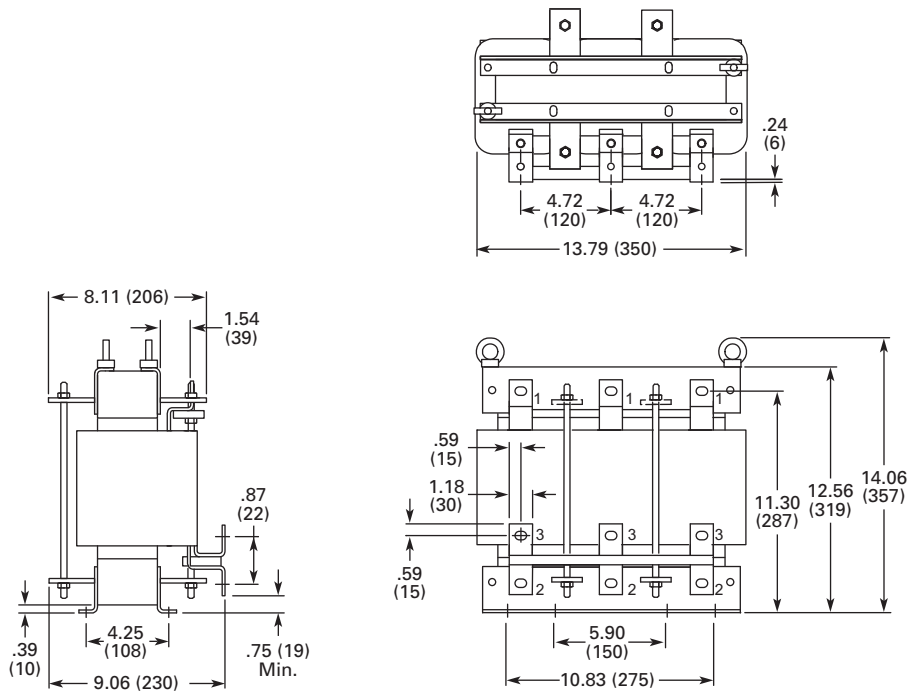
Dimensions of AC Choke CHK0261 in Inches (mm)
